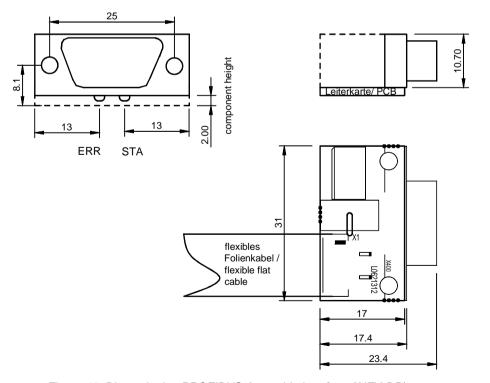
Dimensioning PROFIBUS Assembly Interface (AIFX-DP)
